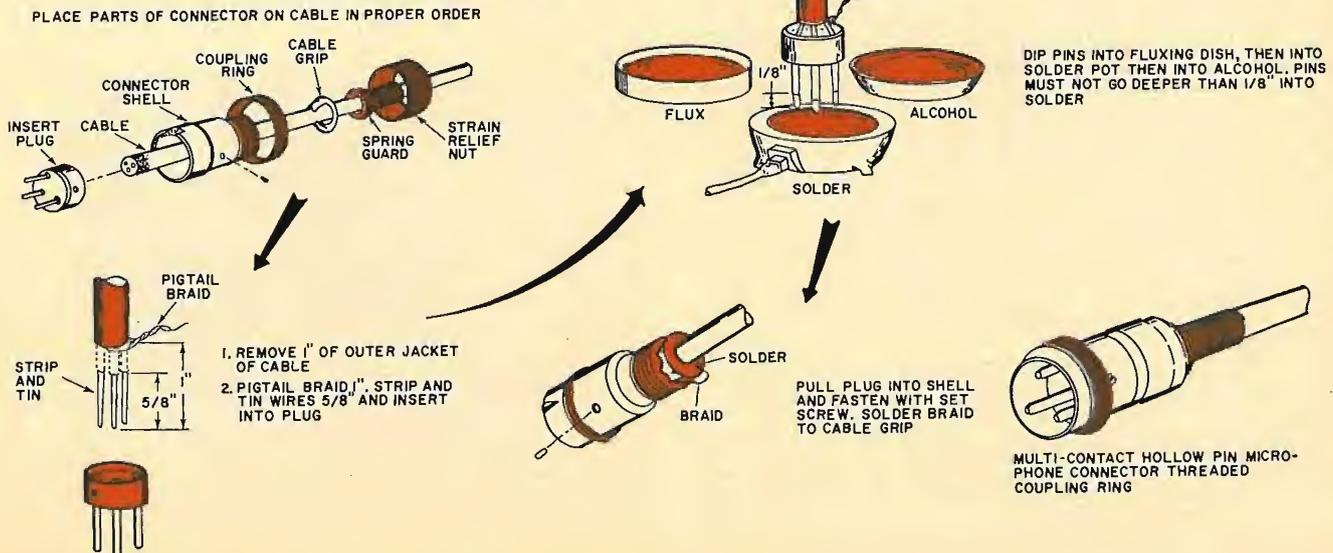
When assembling multi-contact connectors, the insulation should butt the pins, and the conductors and pigtails be pretinned before placing in the solder cups.
